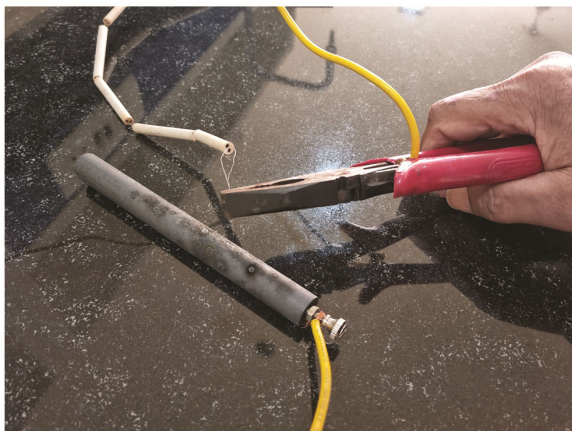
A photograph depicting preparation of a thermocouple by an ingenious technique of spot welding.
